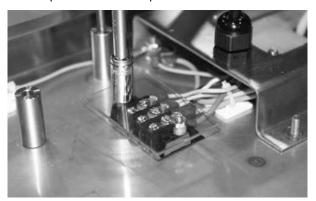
Remove Upper Nut of the Power Cord Cover Assembly
